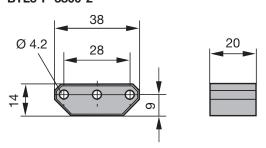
Installation dimensions of BTL5-P-3800-2 magnet
